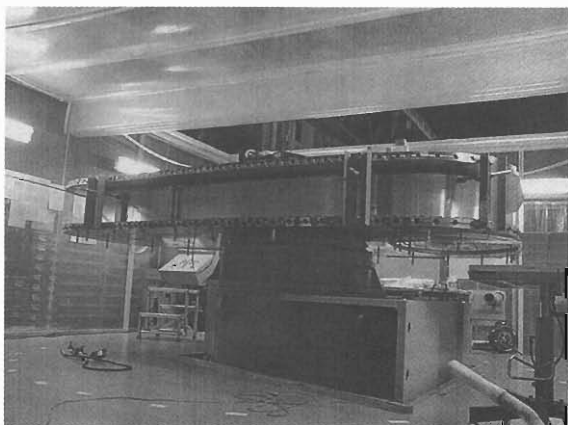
A photograph of the coil winding for the prototype sector magnet.
